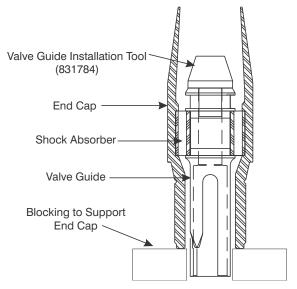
Insert Valve Guide Tool in the Valve Guide.
